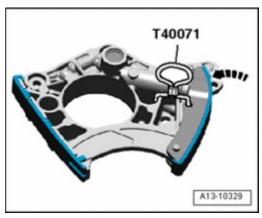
Pressing Left/Right Camshaft Timing Chain Guide Rail Inward And Securing Chain Tensioner
